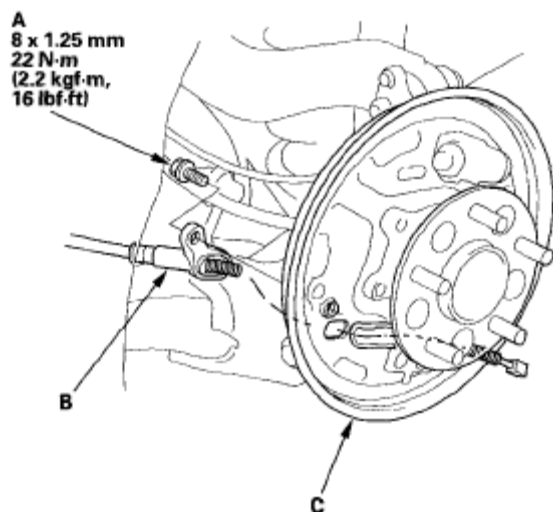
Removing Flange Bolt And Parking Brake Cable (With Specifications)
